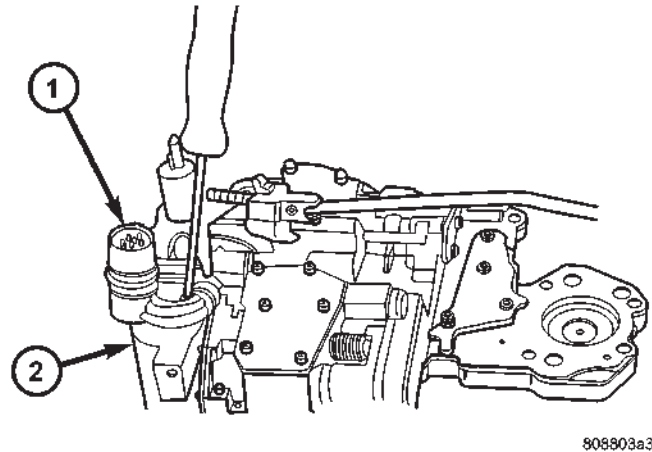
Solenoid Harness Case Connector Shoulder Bolt
